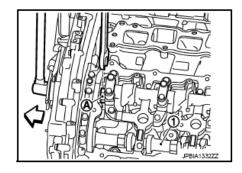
Loosening Mounting Bolt Of Camshaft Sprocket Using Wrench Courtesy of NISSAN MOTOR CO., U.S.A.
